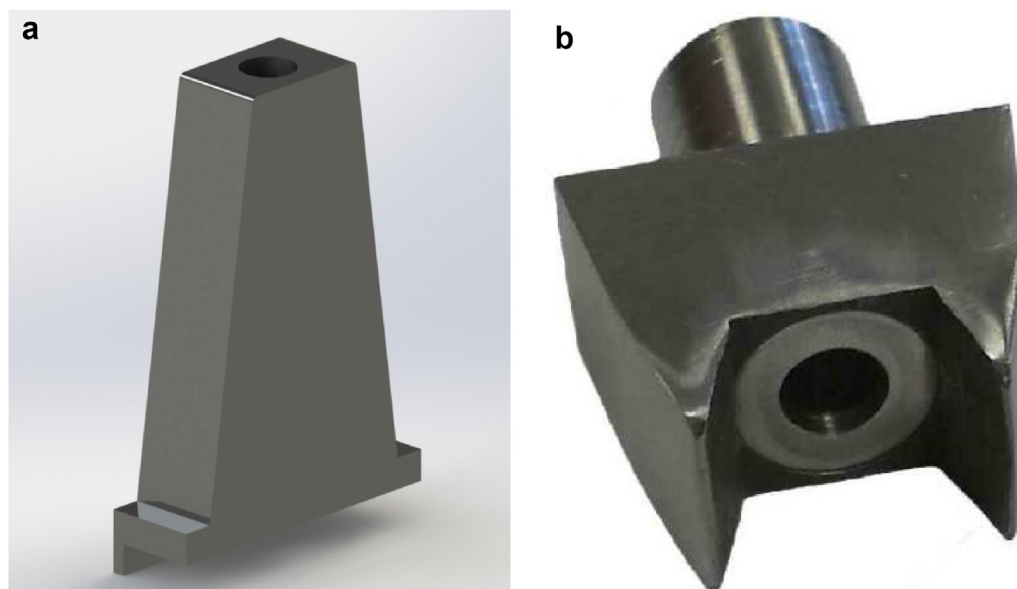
Dies for combined rolling-extrusion process: (a) flat die, (b) conical die.
